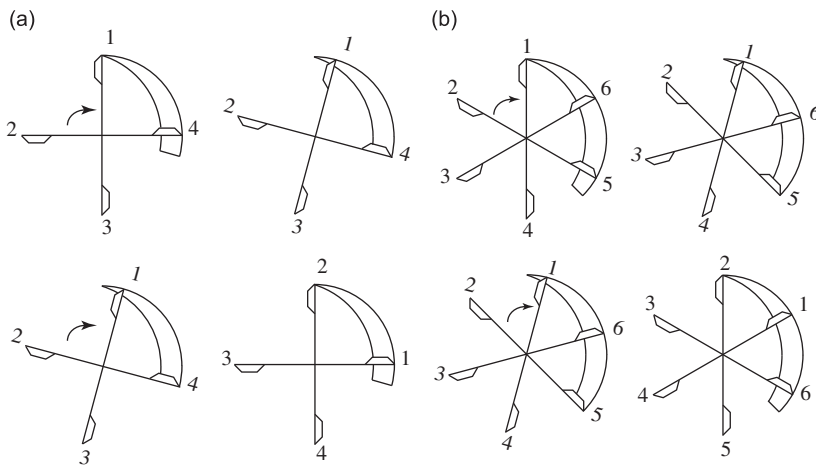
The periodicity in a milling operation for (a) a 4-tooth cutter, and (b) a 6-tooth cutter.
